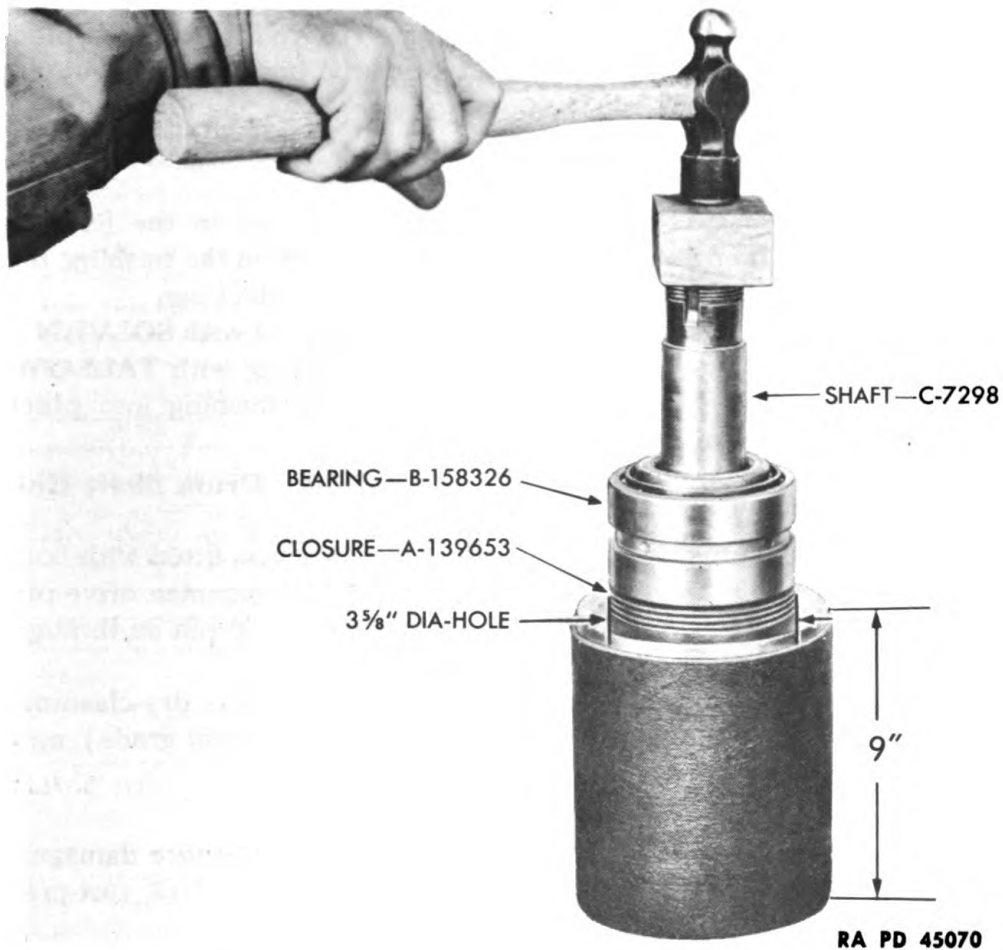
Removing Bearing and Closure from Elevating Brake Drum Shaft
